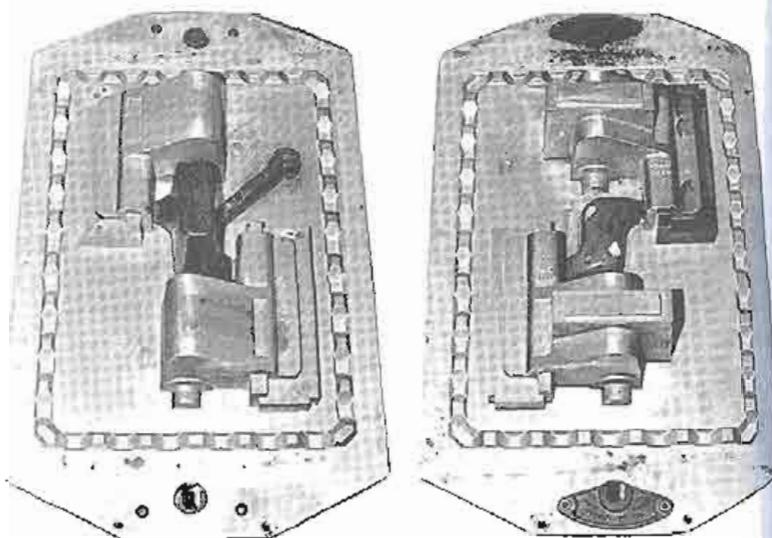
Match-plate pattern used to produce two identical parts in a single flask. (Left) Cope side; (right) drag side. (Note: The views are opposite sides of a single-pattern board.)
